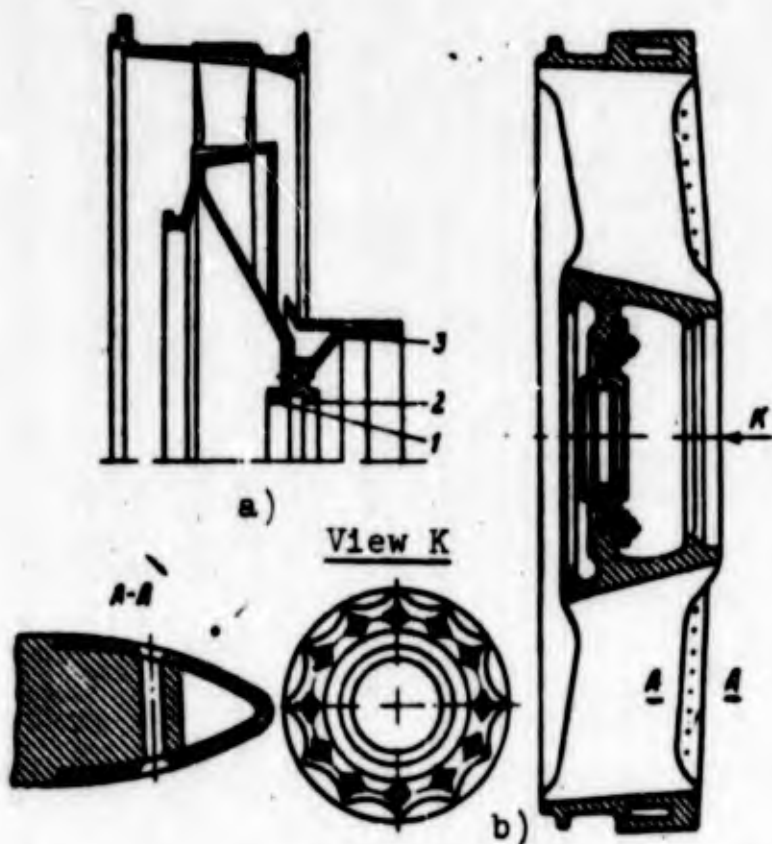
Housings of supports. a) welded; b) cast.
